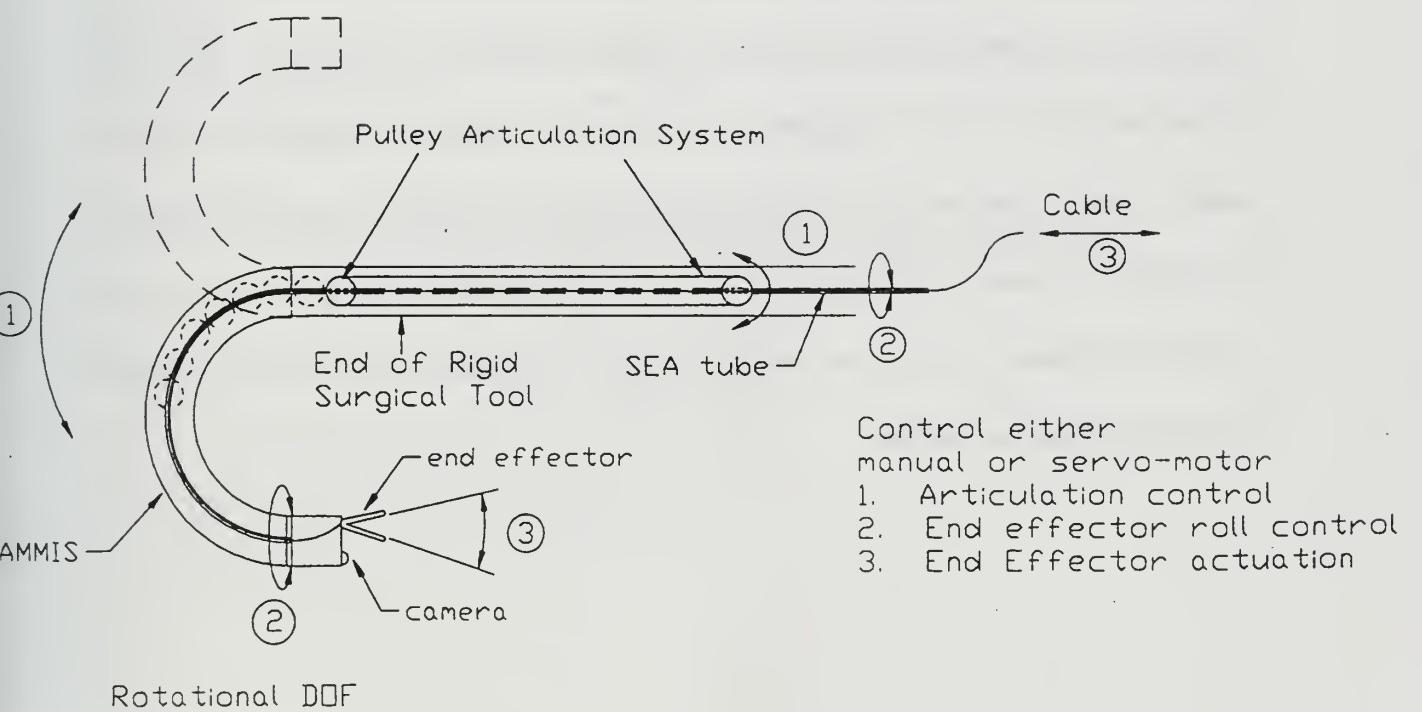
A Schematic of the AMMIS Attaced to the end of a Rigid Surgical Tool
